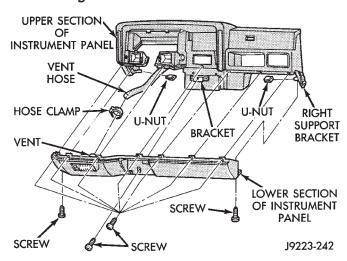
Lower Section Of Instrument Panel Removal/ Installation
